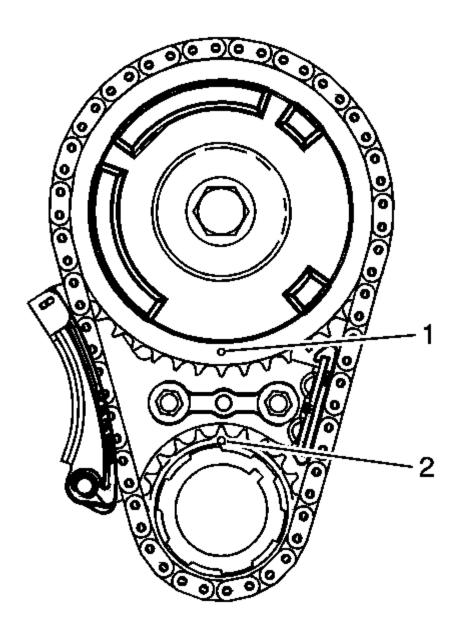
Identifying Camshaft & Crankshaft Marks Courtesy of GENERAL MOTORS CORP.
